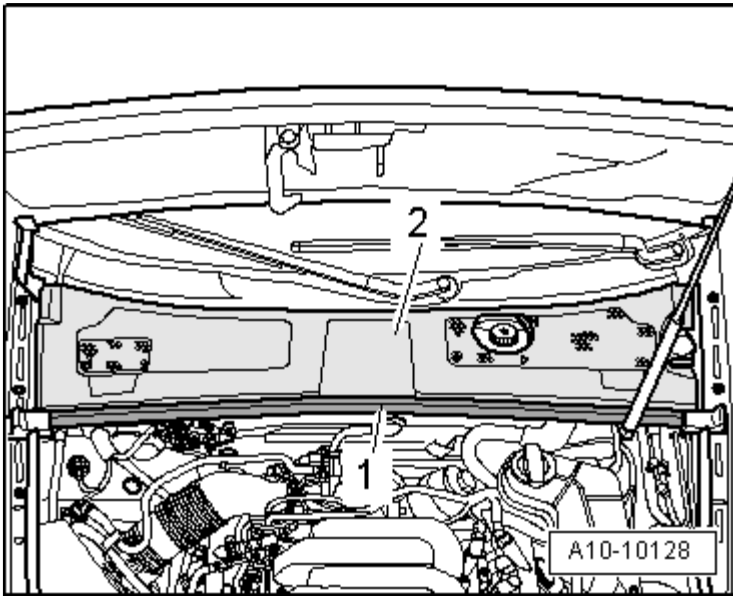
Removing Rubber Seal For Plenum Chamber Cover & Plenum Chamber Cover
